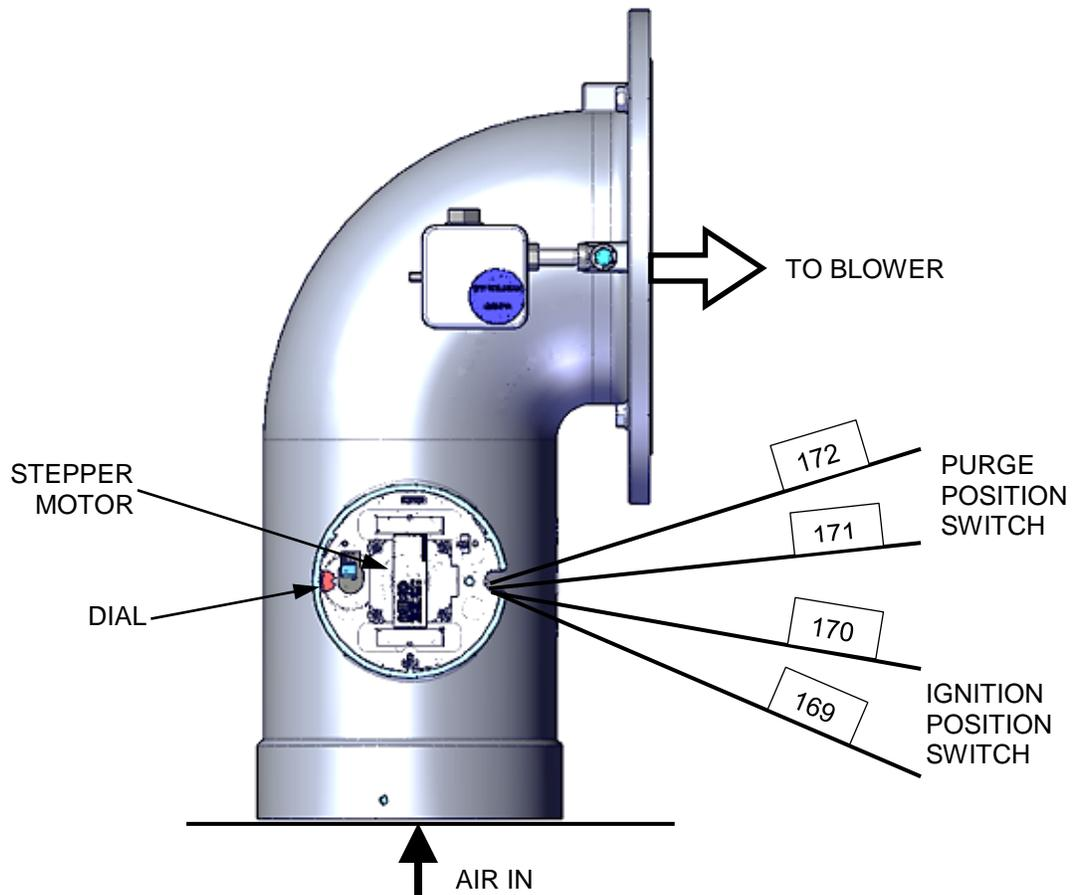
Air/Fuel Valve Purge and Ignition Switch Locations
